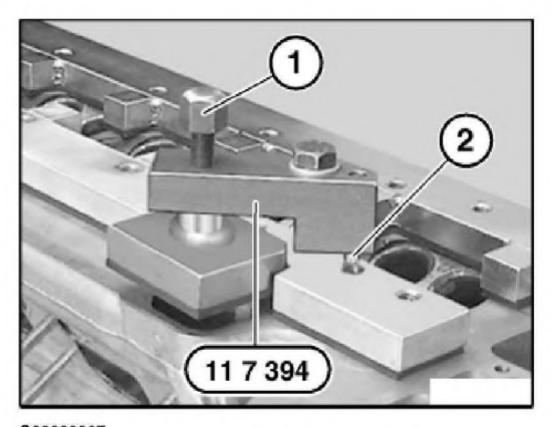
View Of Pressure Testing Fixture Courtesy of BMW OF NORTH AMERICA, INC.
